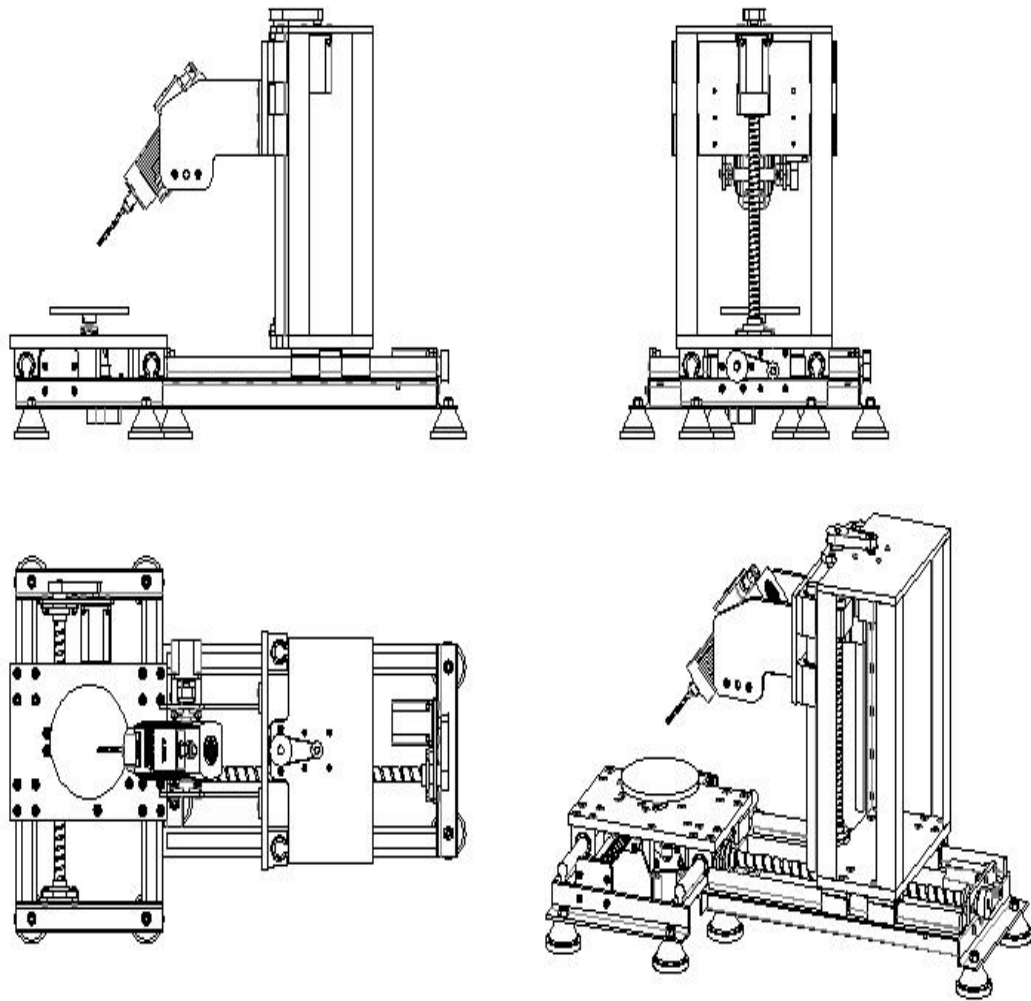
Figure Appendix A.1. Different views of 5-axis desktop CNC milling machine.
